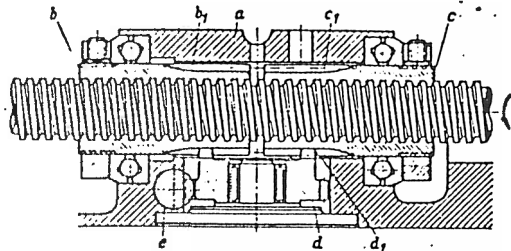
Backlash eliminator in the feed drive nut of a milling machine table. (The Cincinnati Milling Machine Company, Cincinnati, Ohio, U.S.A.).
